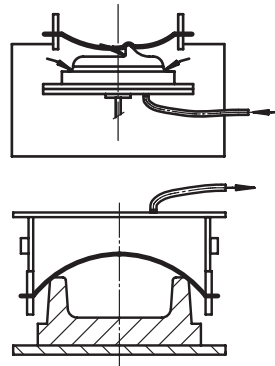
Preforming with presuction (this is not possible in all thermoforming machines)
